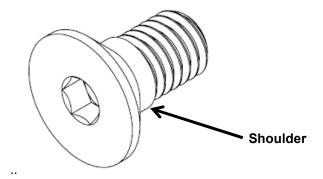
M5 x 10 flat-head cap screw with precision-machined shoulder
